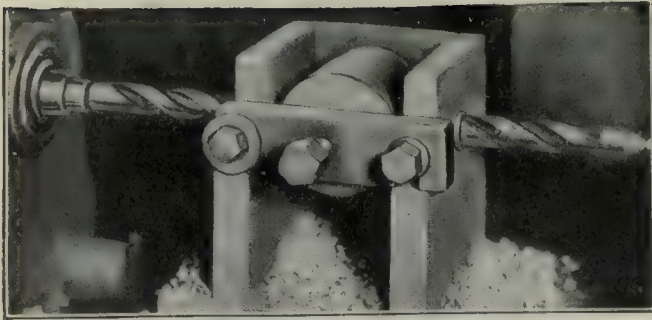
CROSS-DRILLING THE PISTON-PIN HOLE
